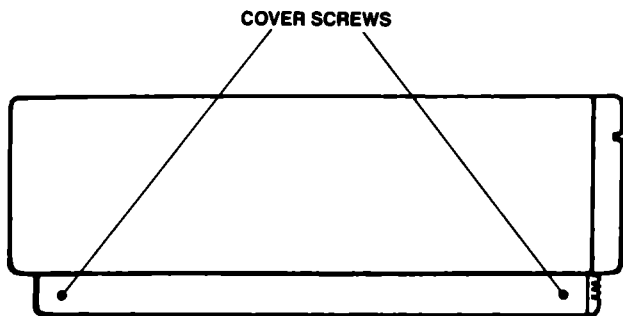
COMMODORE PC10/PC20 — LEFT SIDE VIEW
